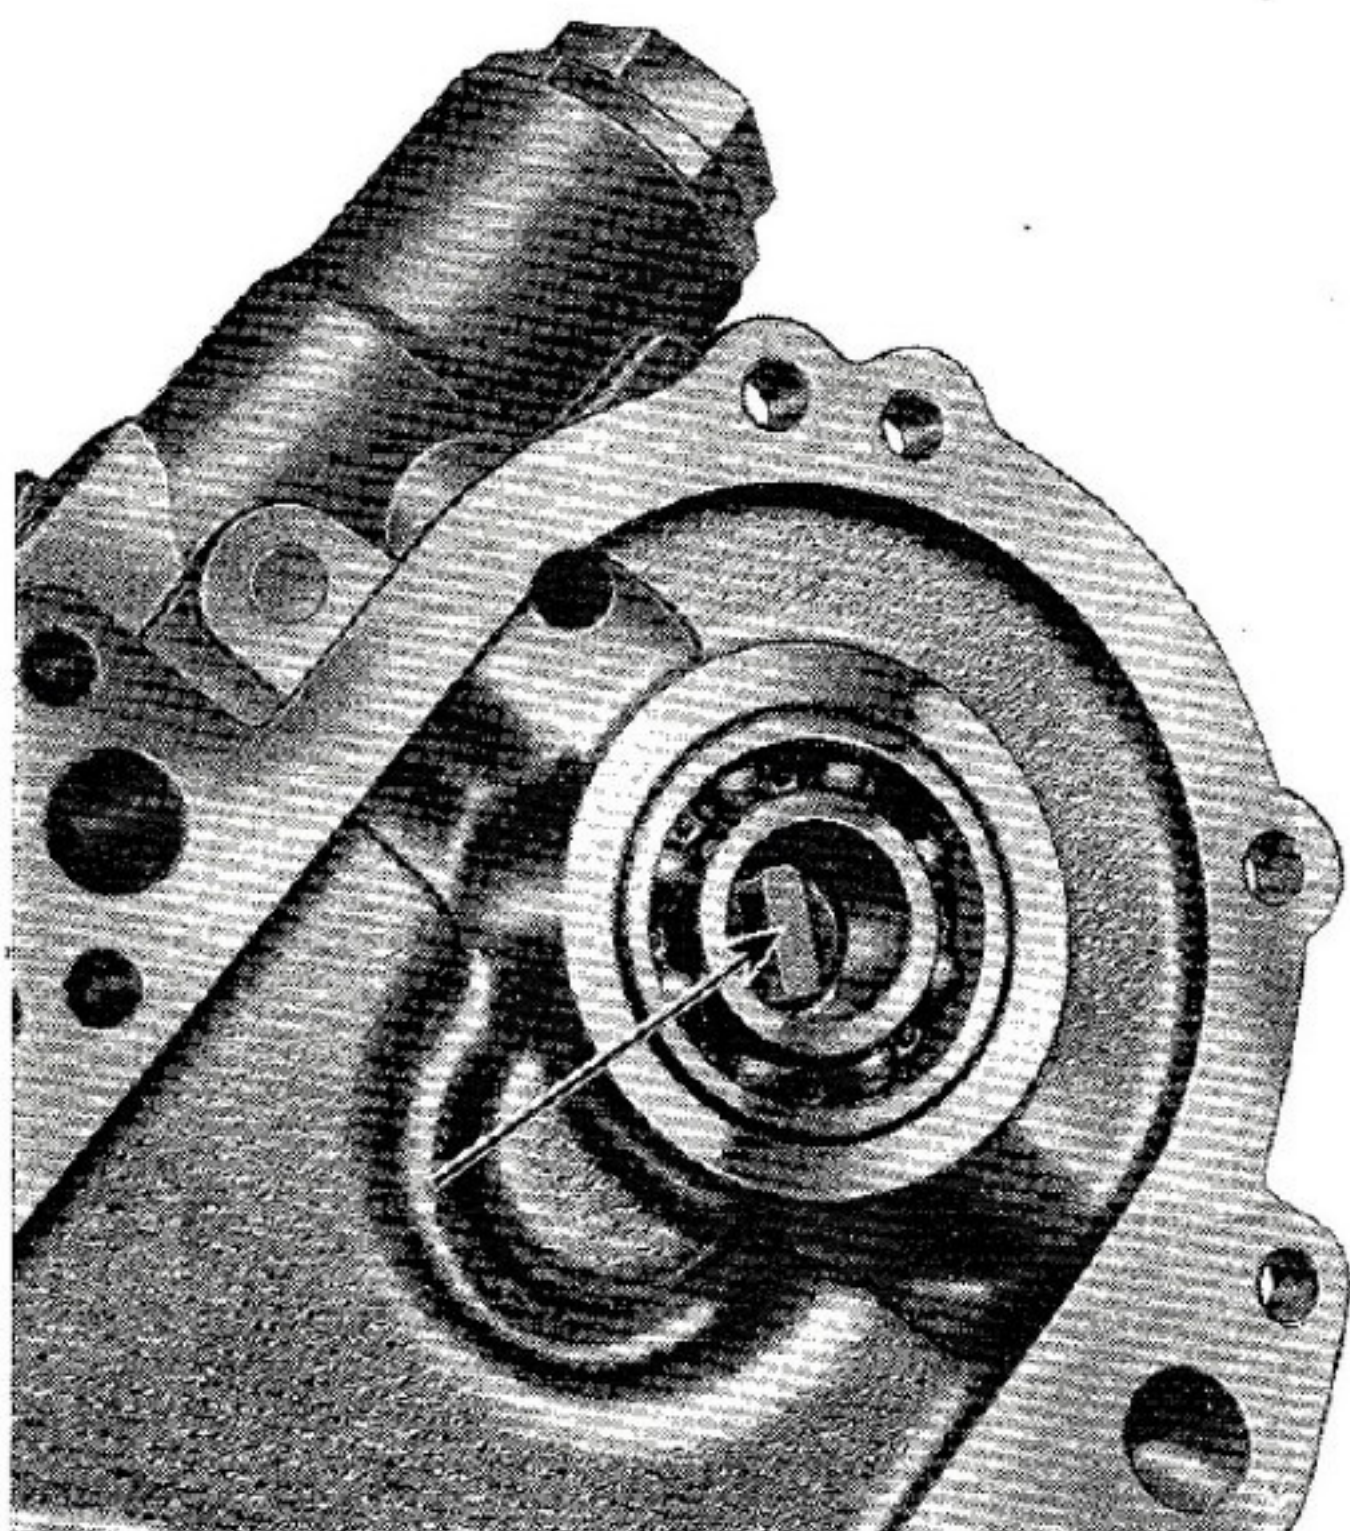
Detail of the oil pump body with bearing. Arrow points to the shaft drive joint.
